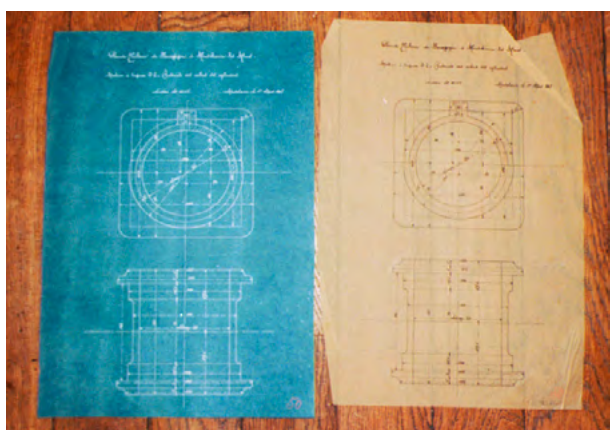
Le Creusot Ecomusée : Pipe machine circa 1901, drawing and print of manufactured part
